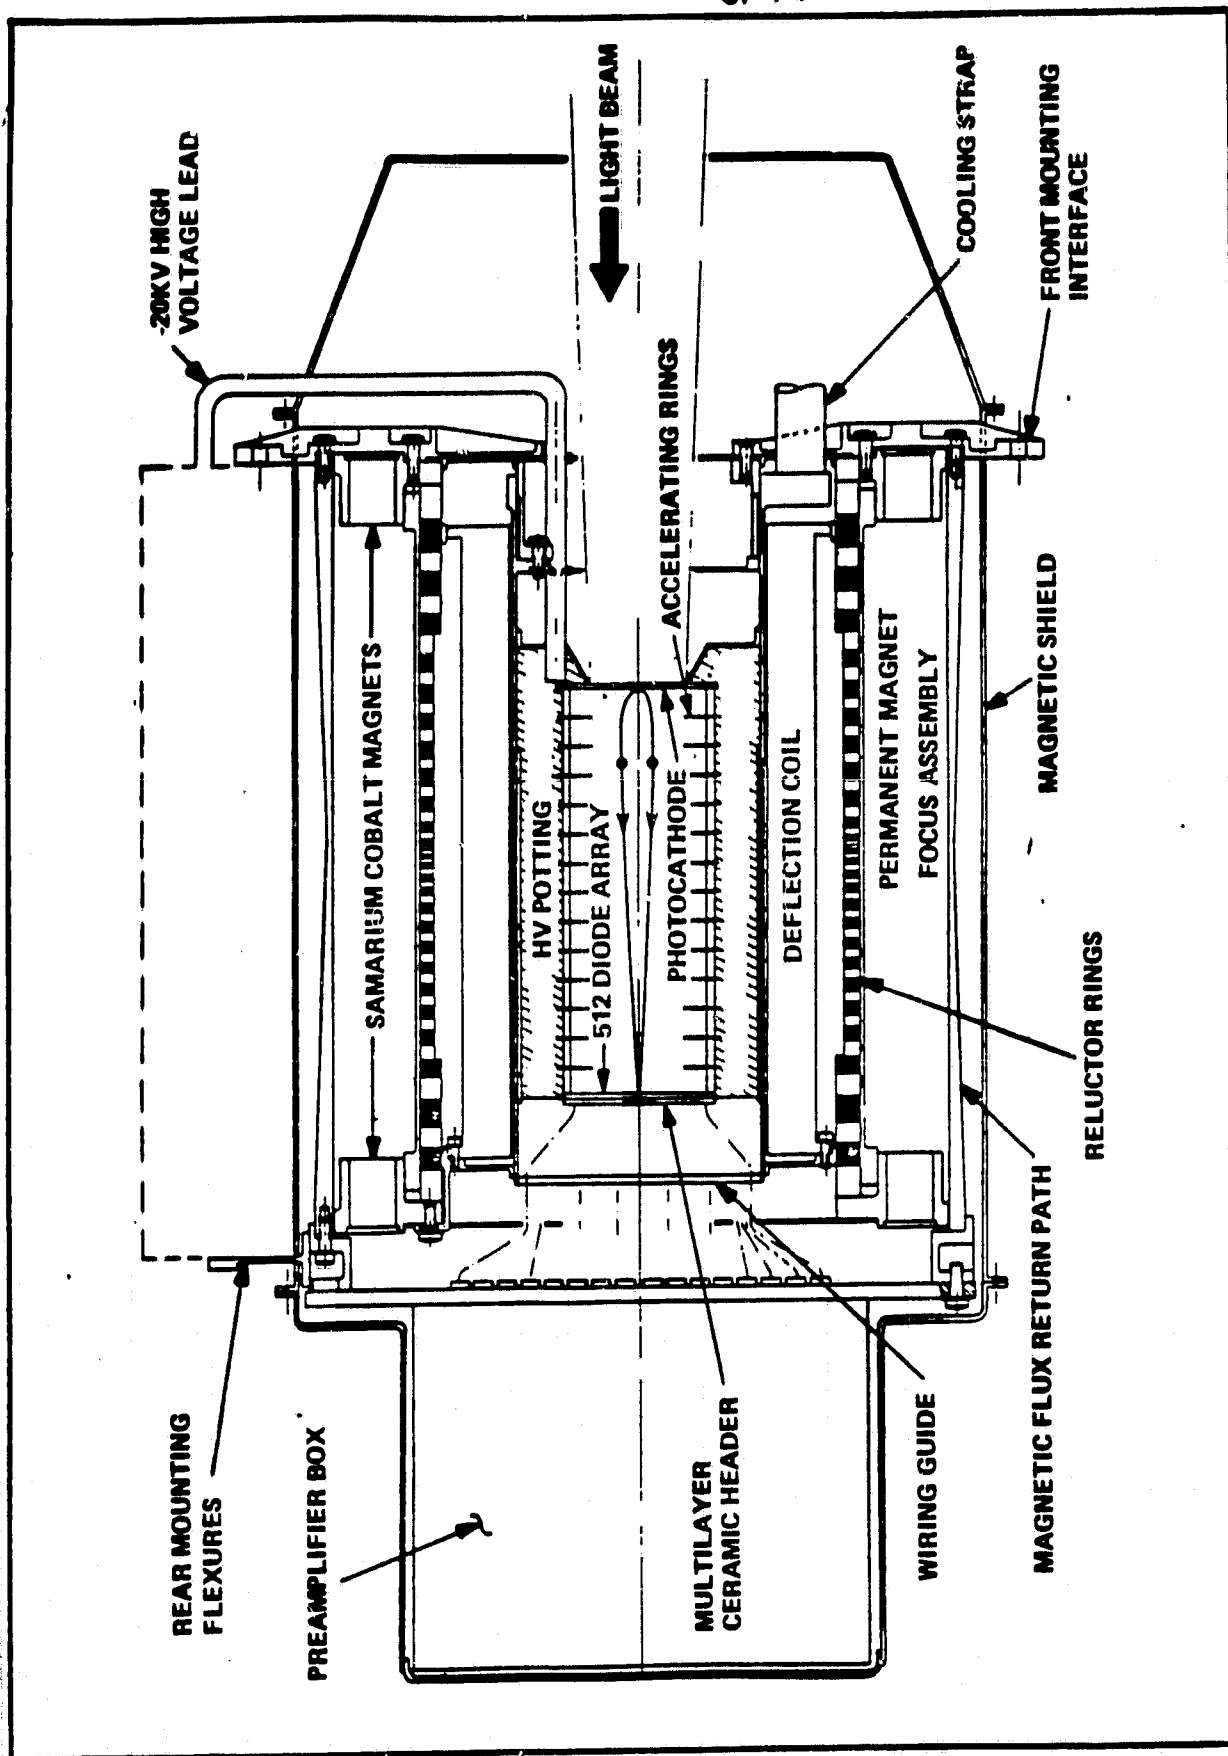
Cross-sectional view of HRS Digicon detector assembly.
